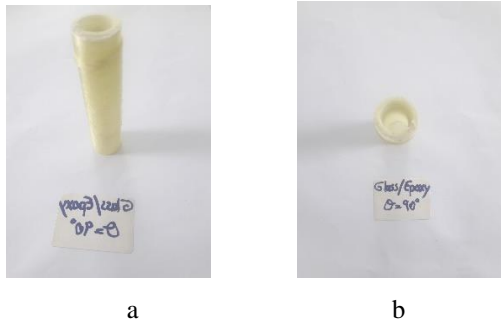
Damage formation of glass/epoxy specimen under axial compression load; a) front view, b) top view
